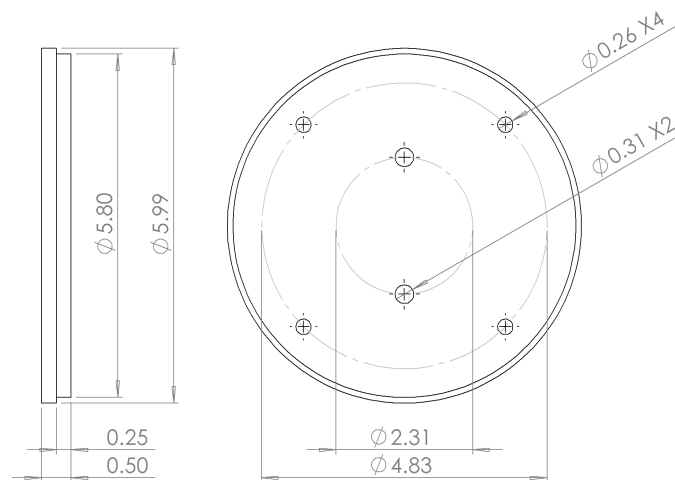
AVAB bulkheads dimensional drawing (in.)
